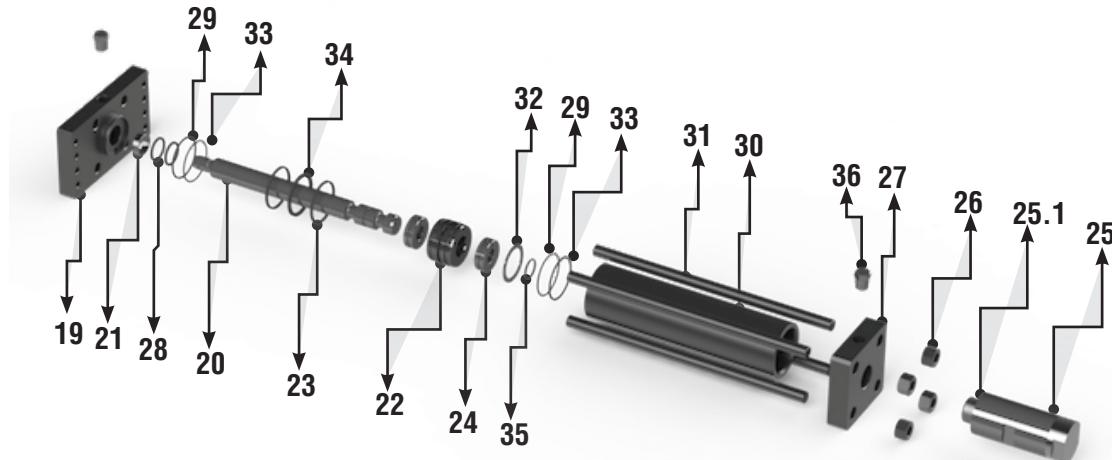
Exploded View of Hydraulic Cylinder – split ring version
